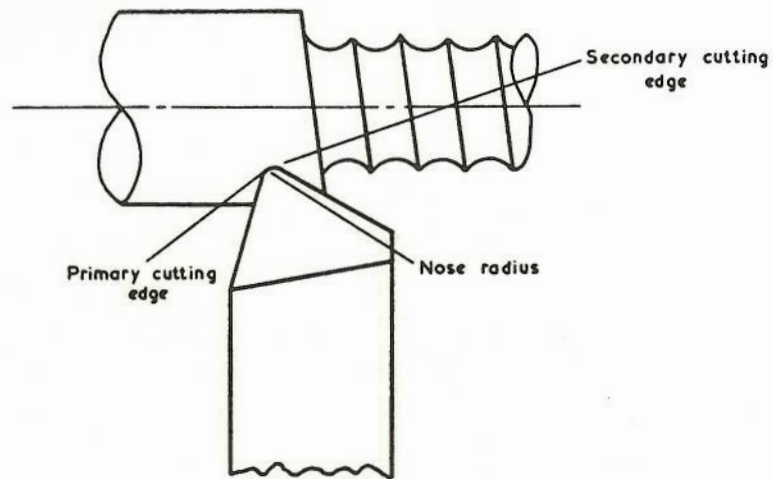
CUTTING OPERATION SHOWING PRIMARY AND SECONDARY CUTTING EDGES AND WAVE FORM LEFT ON THE FINISHED SURFACE.
